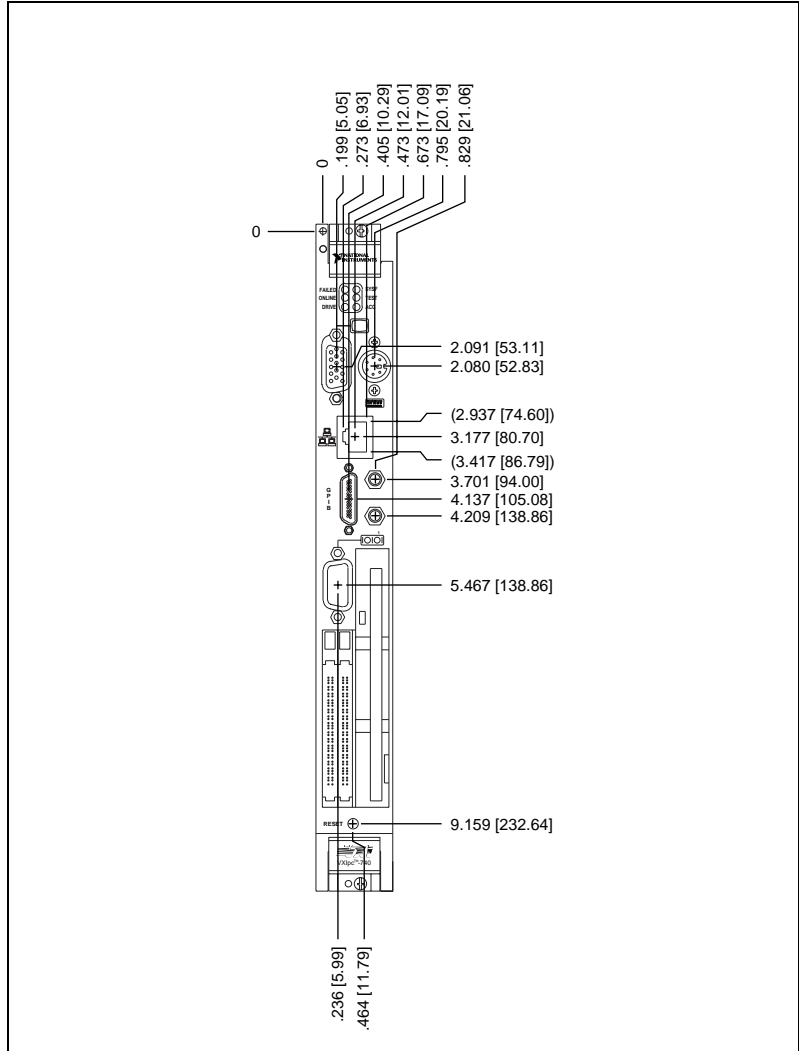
VXIpc-745 Front Panel Layout and Dimensions
